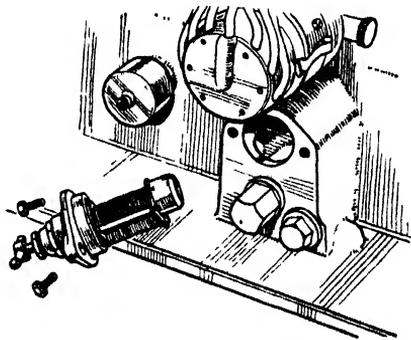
An Oil Filter which is automatically cleaned by turning an exterior handle
